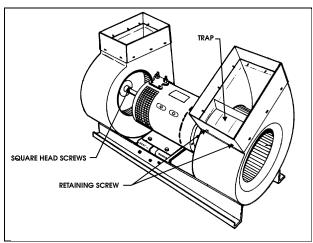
EVAPORATOR MOTOR ASSEMBLY
